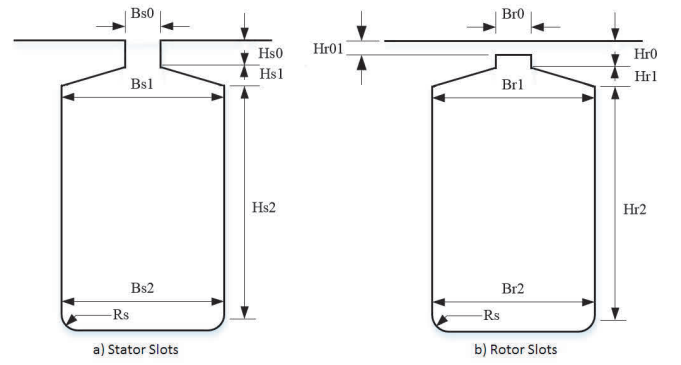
Definition of slot dimensions for (a) stator slots, and (b) rotor slots.
